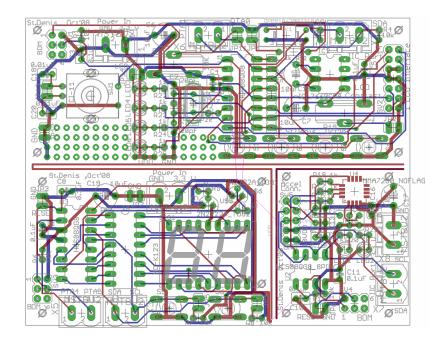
PCB layout of the LCD, seven segment display and accelerometer boards. Fabricated together, then split apart.
